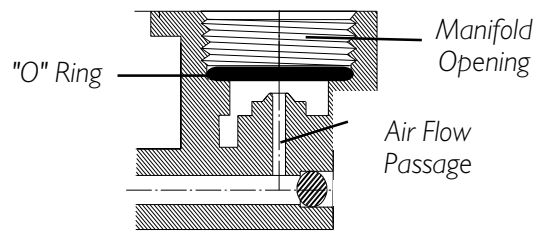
REMOVING/INSTALLING "O" RINGS
